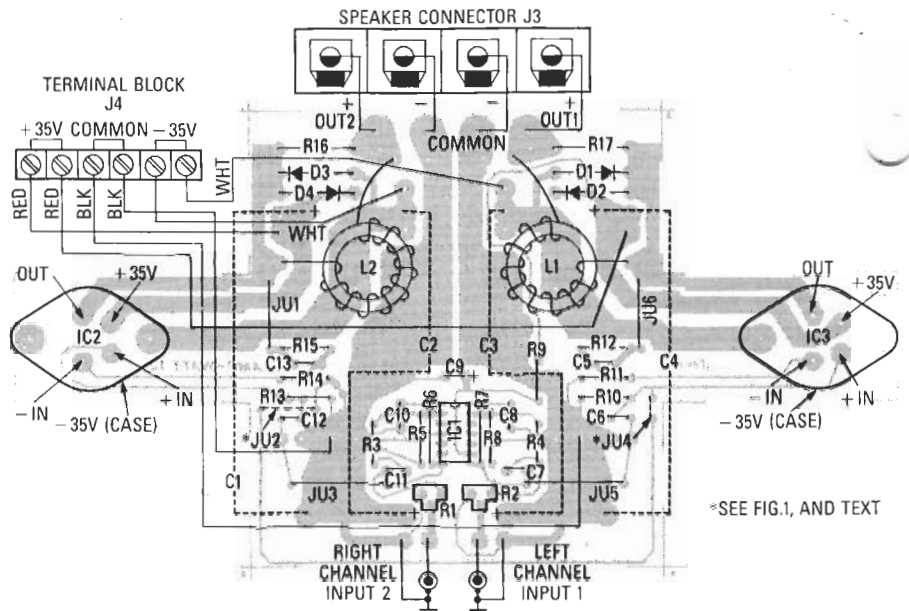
PARTS PLACEMENT FOR THE OPTO-AMP. The inductors should be wound exactly as shown.
